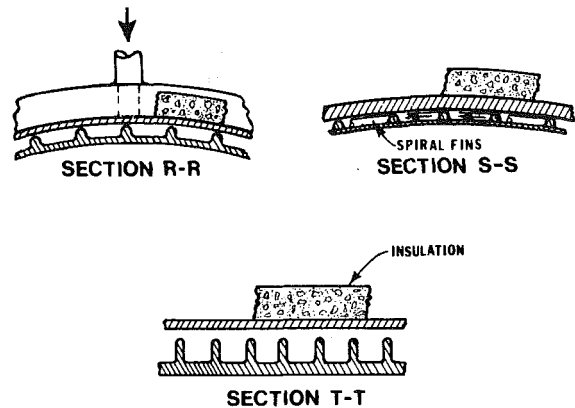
Cross sections of compressor casing, combustion housing, and turbine casing showing extended surface fins, steam passageway, and outer insulation
